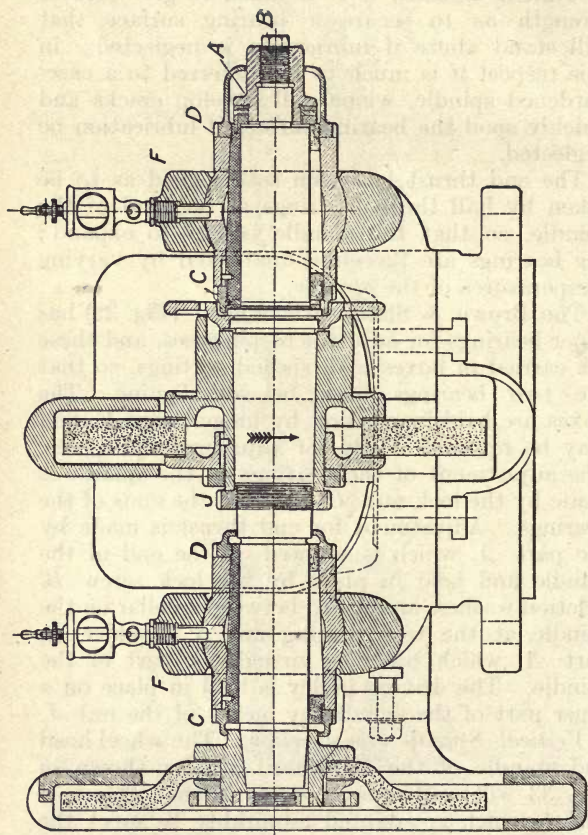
WHEEL SPINDLE AND BEARINGS OF BROWN AND SHARPE
